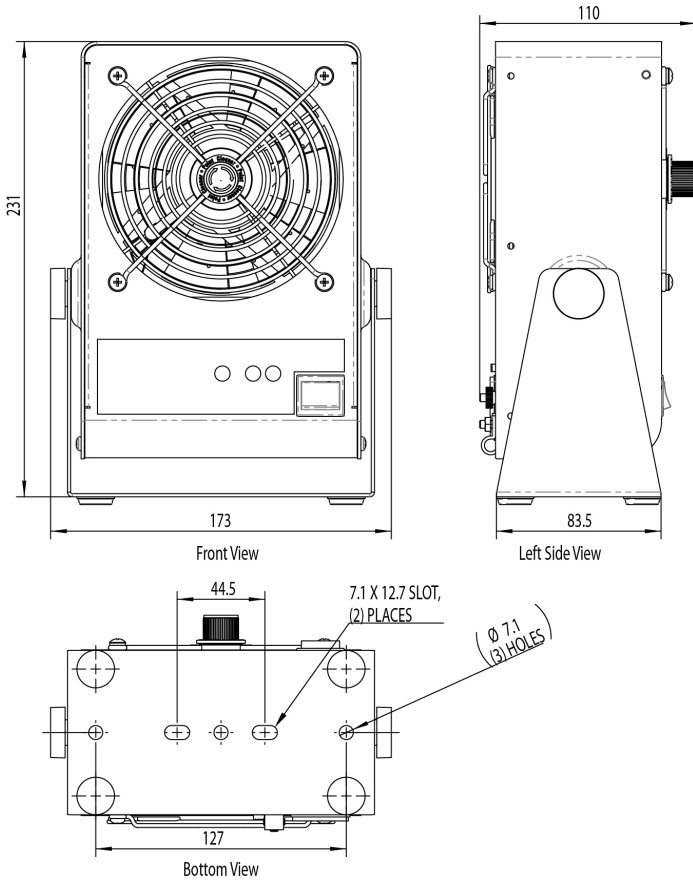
Aerostat PC2 Mounting (dimensions shown are in mm)
